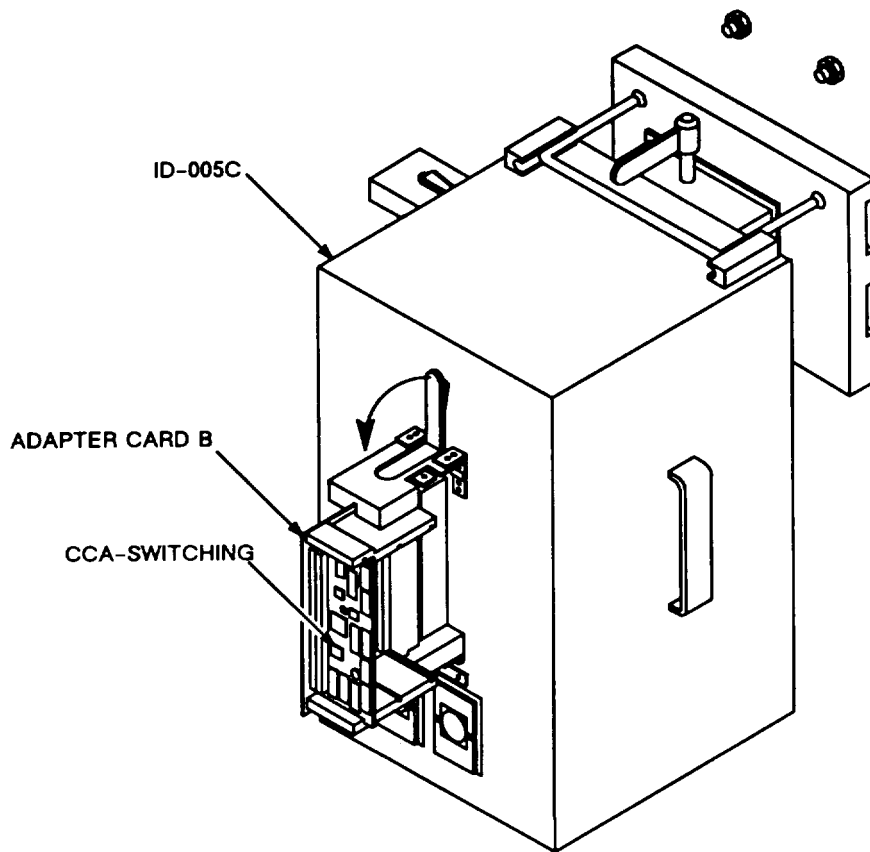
Installation of CCA-Switching on Adapter Card B
